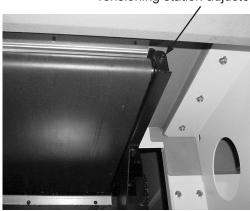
Underside View of Feed Table and Infeed Conveyor
